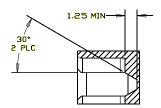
Slimline device plug connector interface dimensions (section B-B)
